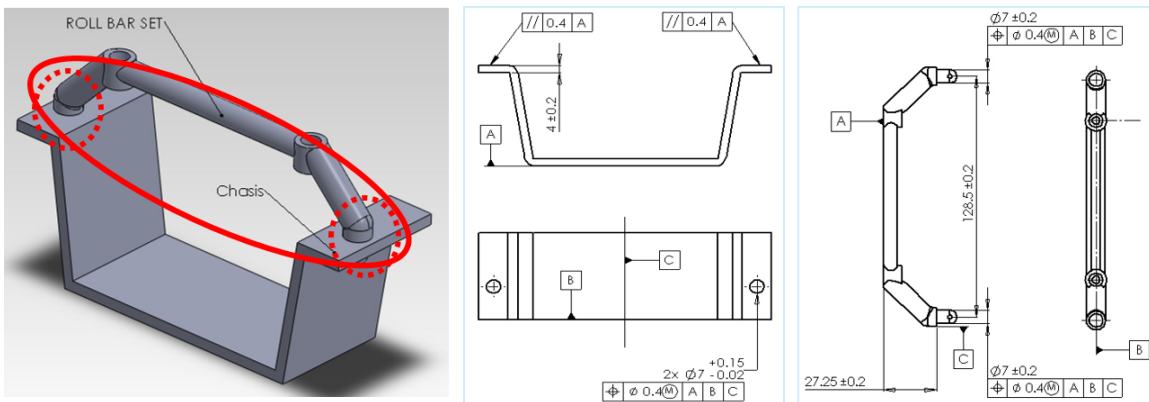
29: GD&T Created in the University of Vanderbilt for the chassis and roll bar sub-assembly
